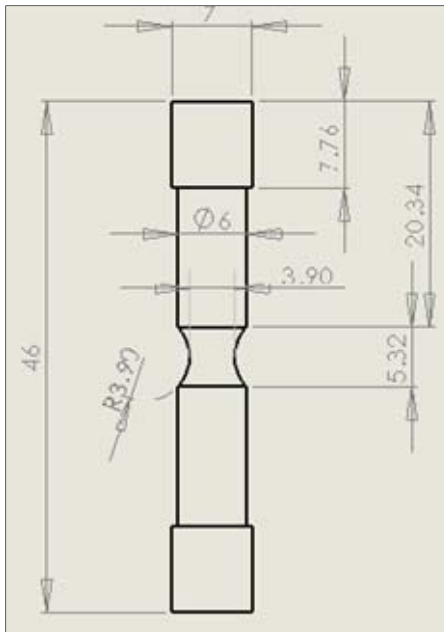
A schematic showing the dimensions of the shallow notched bar samples machined from 7mm diameter cylinders.
